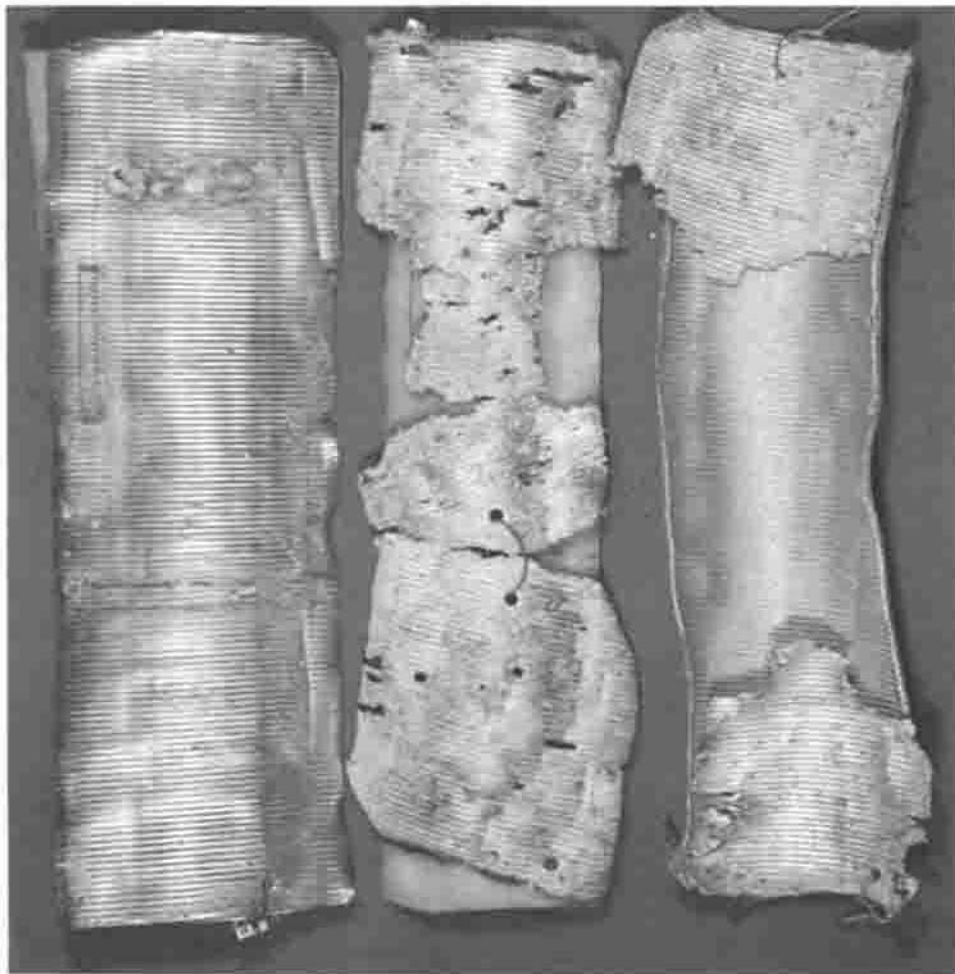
Galvanic corrosion of aluminum shielding in buried telephone cable coupled to buried copper plates. Courtesy of R. Baboian, Texas Instruments, Inc.
